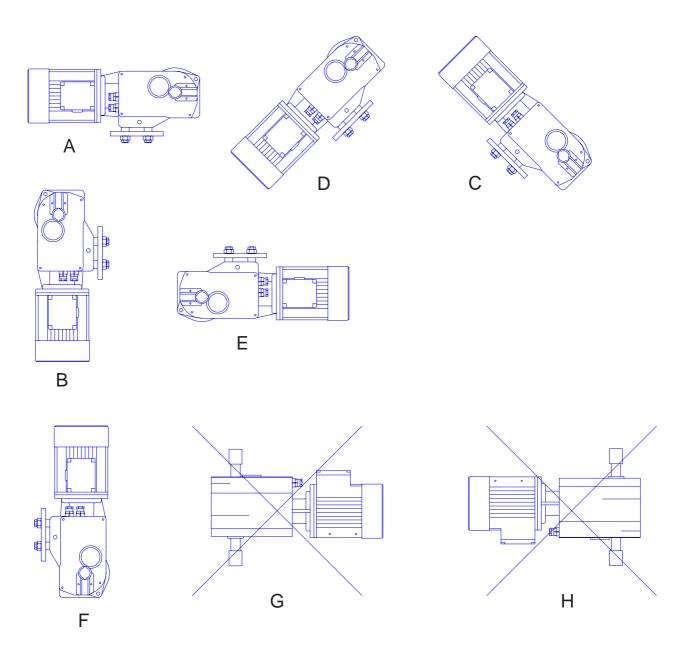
Different mounting methods. The gear is illustrated from the side.
